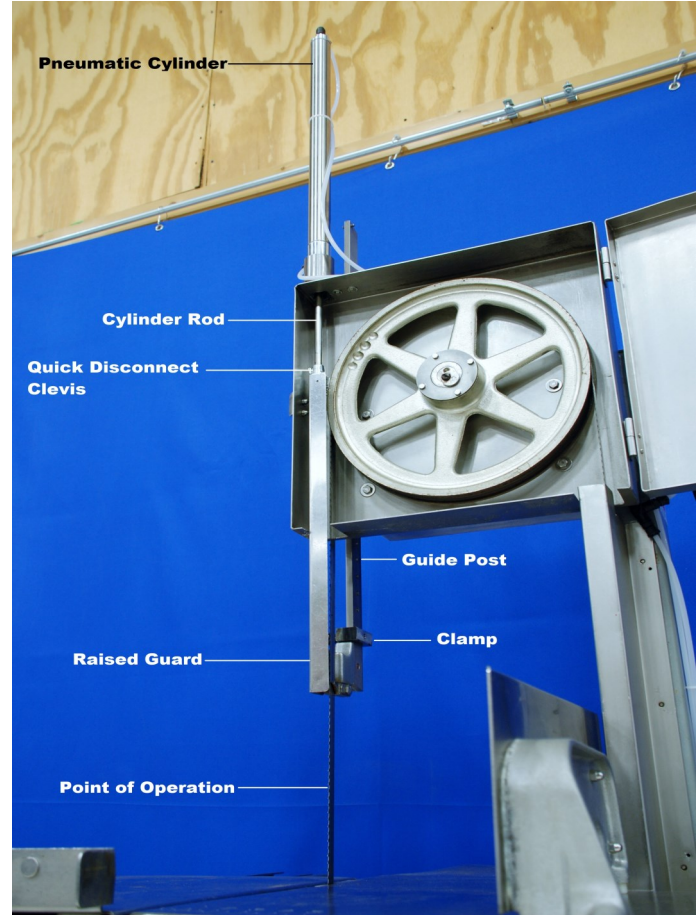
The Linkage: Cylinder, Cylinder Rod, Quick Disconnect Clevis, L-Shaped Guard, Guide Post, Clamp, Blade
